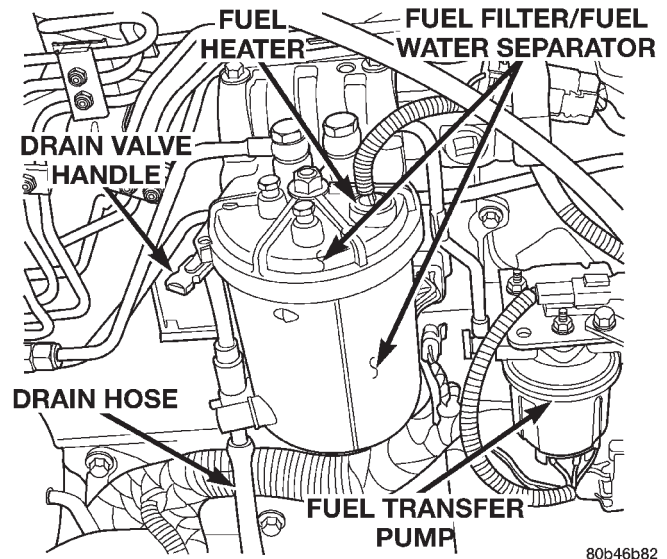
Fuel Filter/Water Separator/Drain Hose Location
